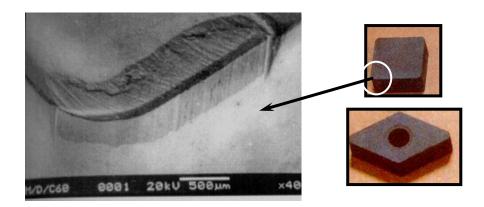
(b) Photographic view of the wear pattern of a turning tool insert
